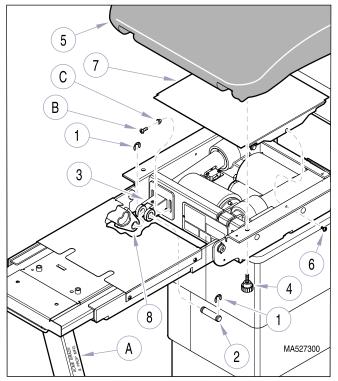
Foot Actuator Limit Switch Removal / Installation
